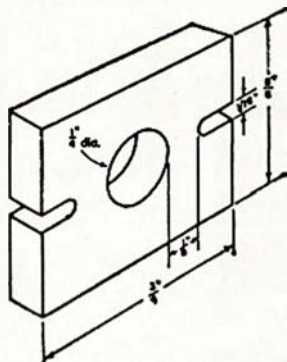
Dimensions of the Insulating spacers used to hold bridge wires and outer conductor strips in place.
